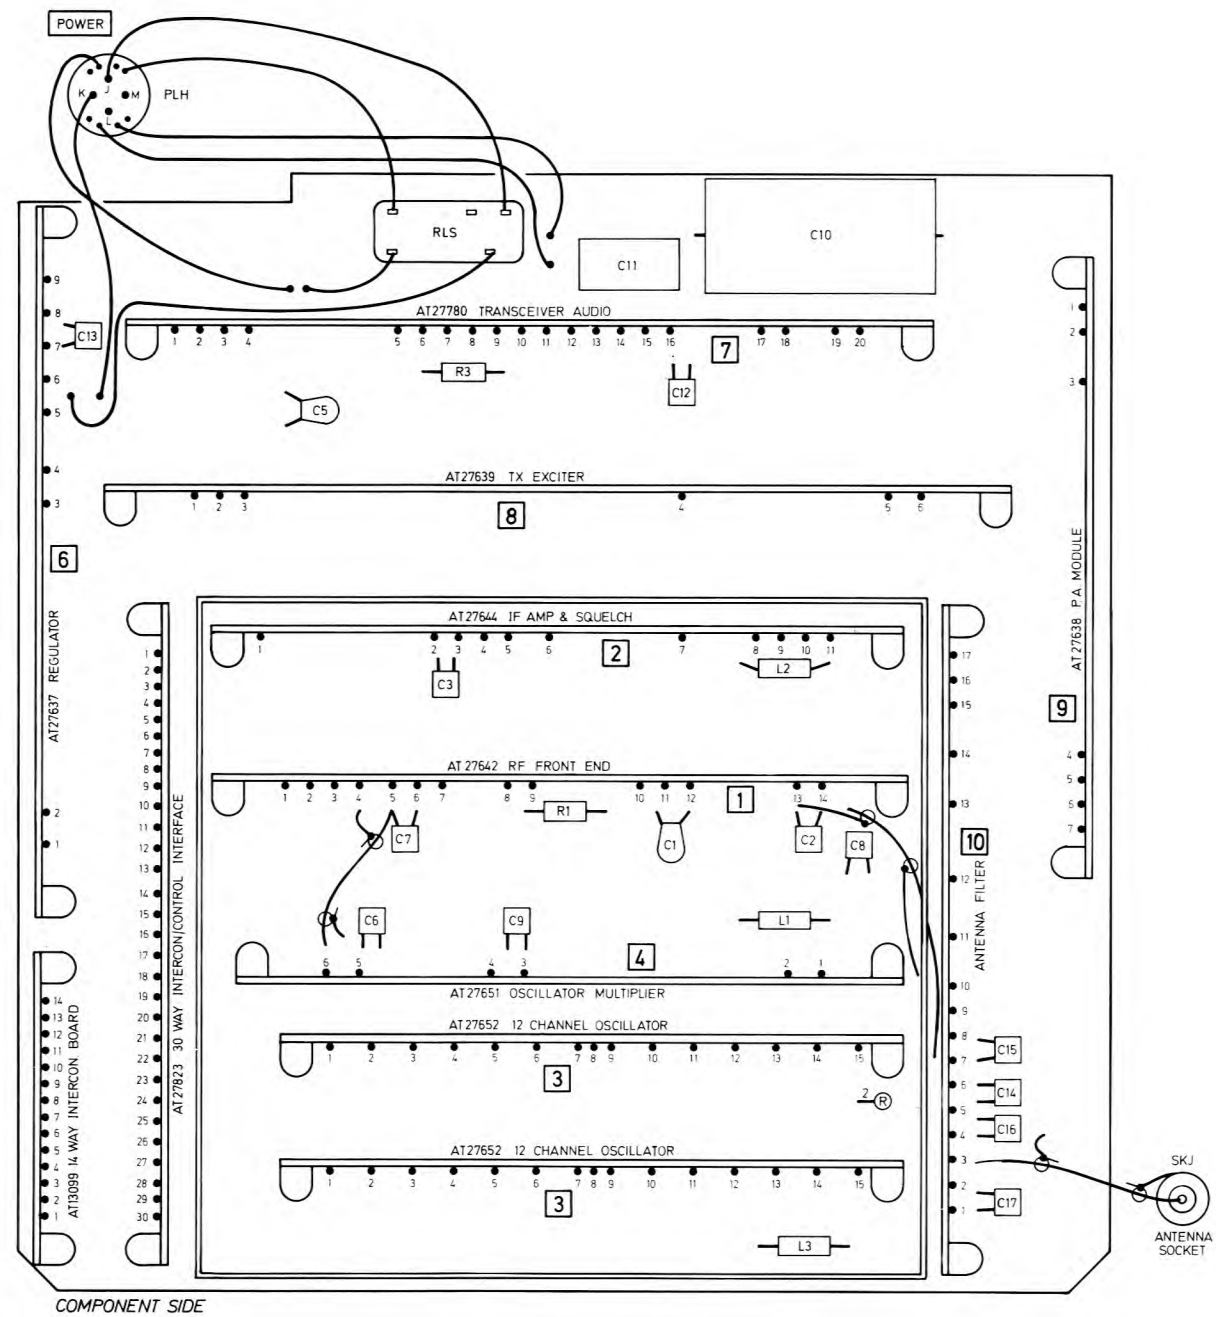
COMPLETE MOTHER BOARD LAYOUT
